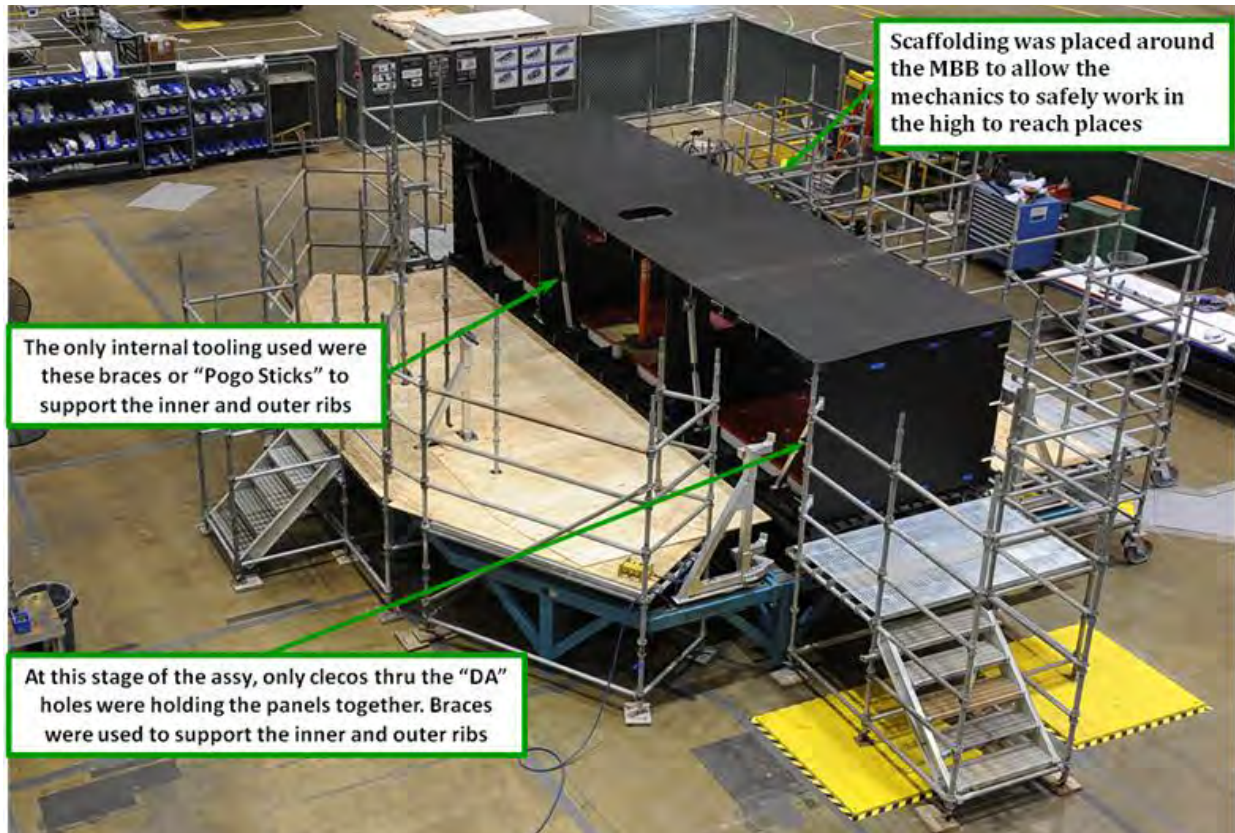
Determinate Assembly "DA" Holes Were Used to Reduce Tooling Costs
